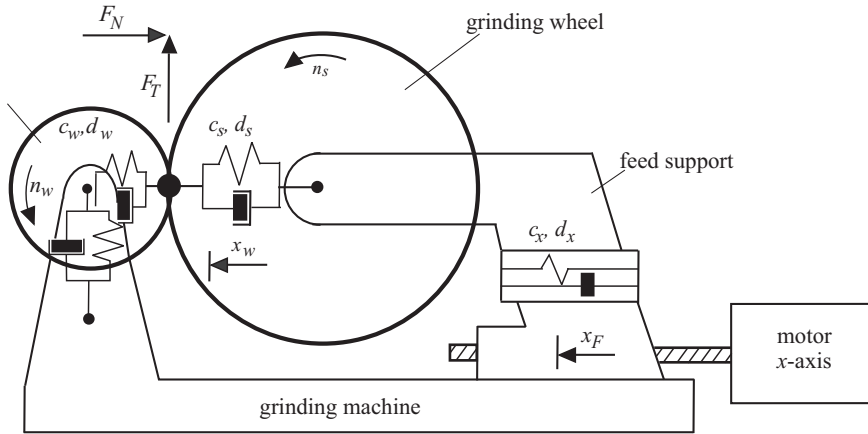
Scheme of the cylindrical surface grinding machine
